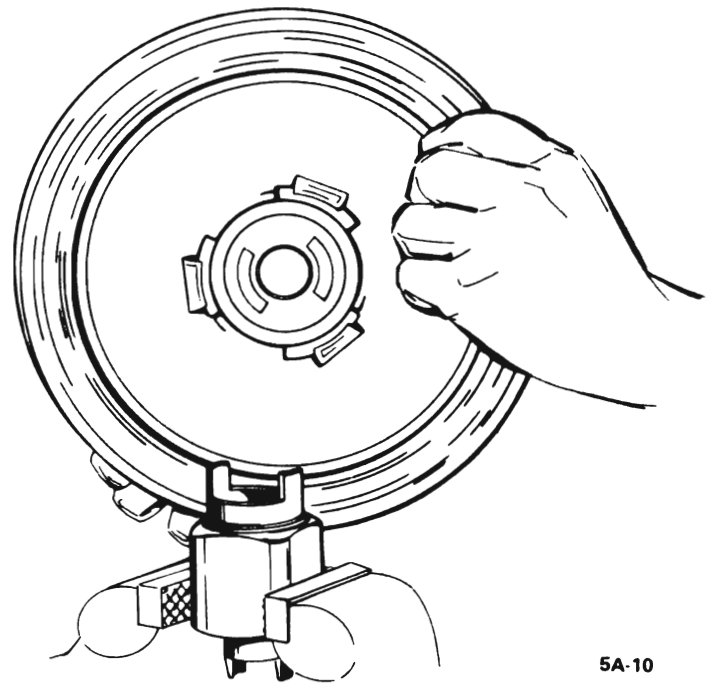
A-10 Positioning Primary Power Piston In Tool J-23101 (Small Dia. End Up) Mounted In Vise
